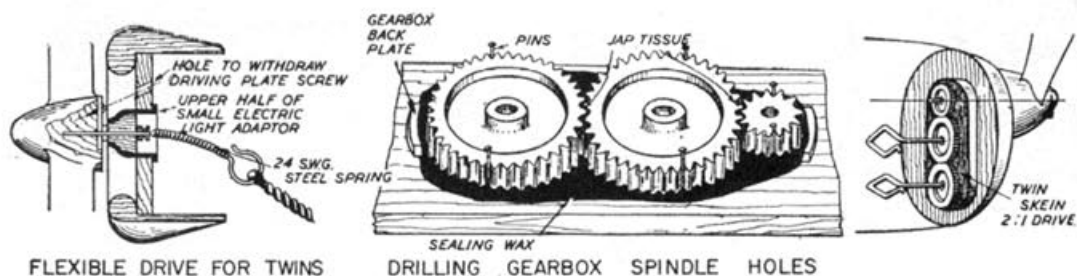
Variations on rubber drive, using flexible shaft or gears.
